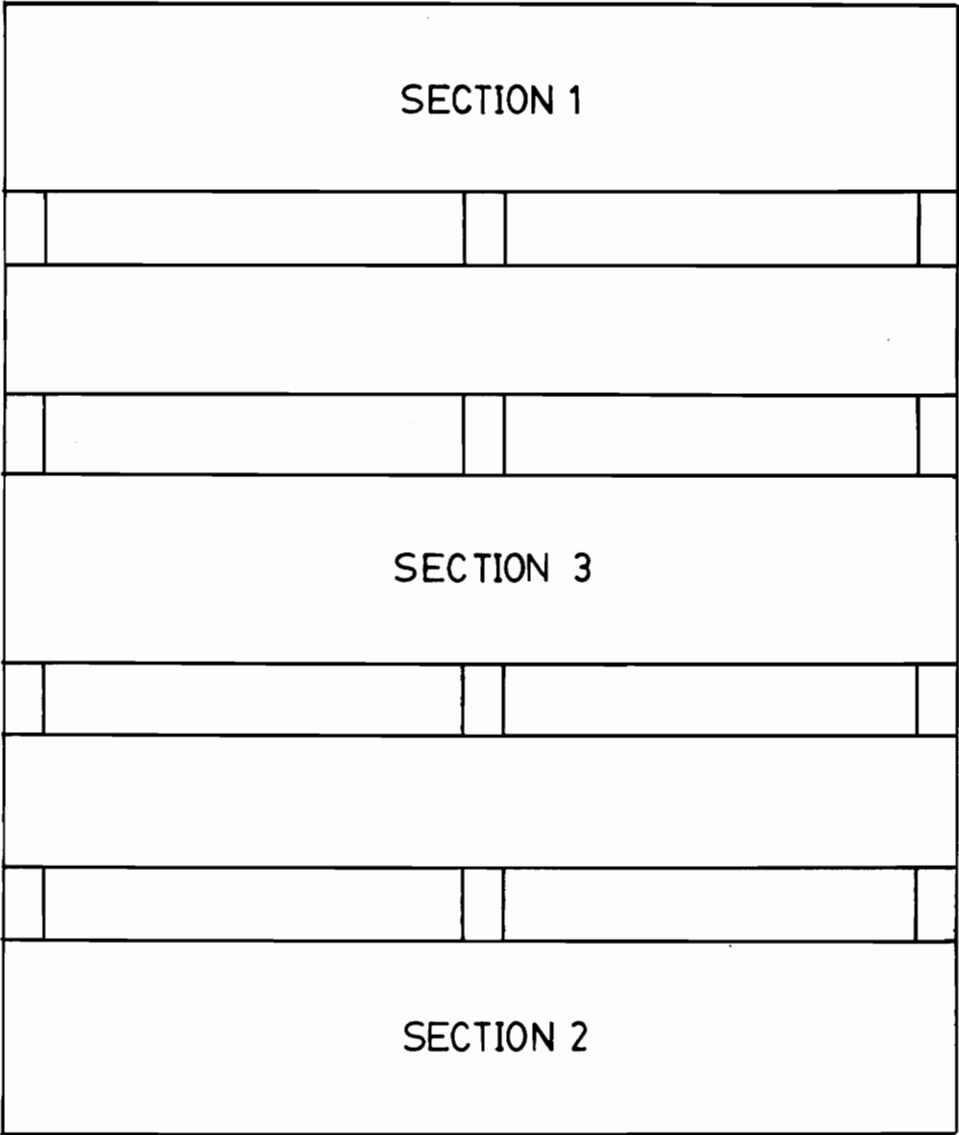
Schematic diagram of the top face of pallet used to contain pallet section models.
